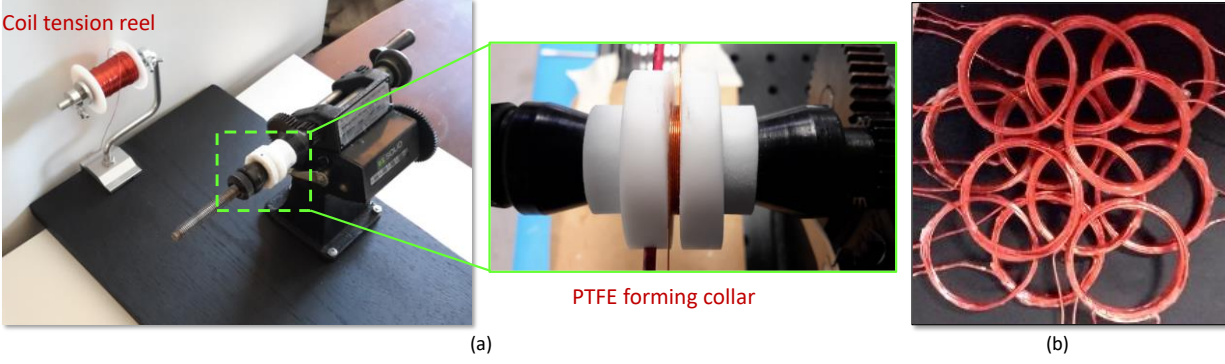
Fabrication of coils and finished dense array. (a) custom coil fabrication fixture and (b) photo of 3-layer dense array.
